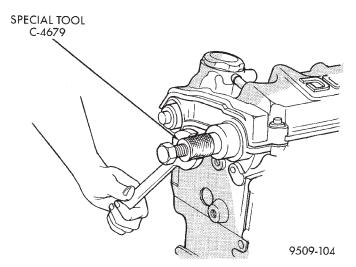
Camshaft Oil Seal—Removal With C-4679–A CAUTION: Do not nick shaft seal surface or seal bore
